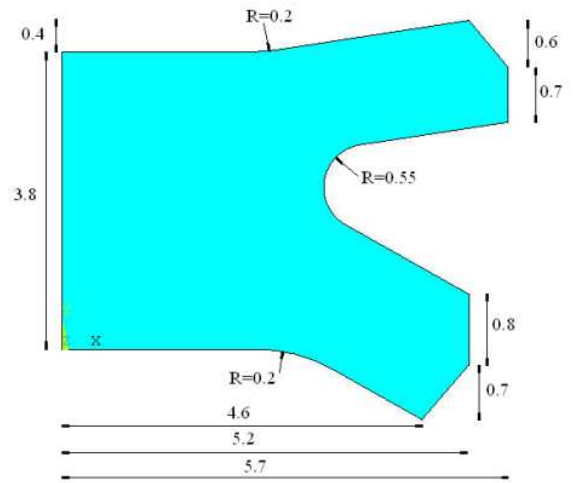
Seal dimensions (mm) assumed in single-lip seal FEA model
